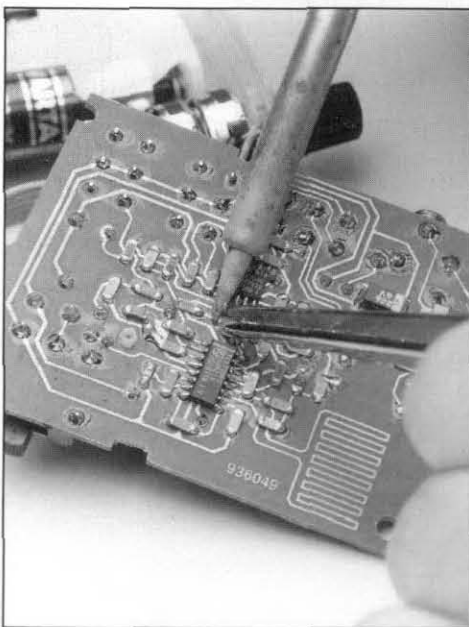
Soldering the SMT parts is not half as difficult as it is often said to be. In fact, all you need is accuracy, a cleaned up work desk, good eyesight, a steady hand, and a low-power solder iron!
